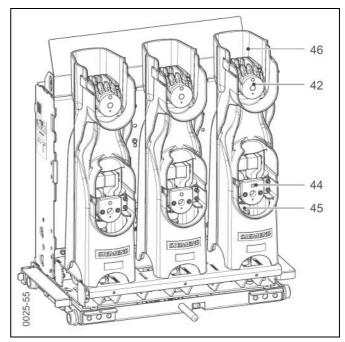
24 kV, 25 kA, 2500 A, pole side with withdrawable part, without insulating shells for system side
